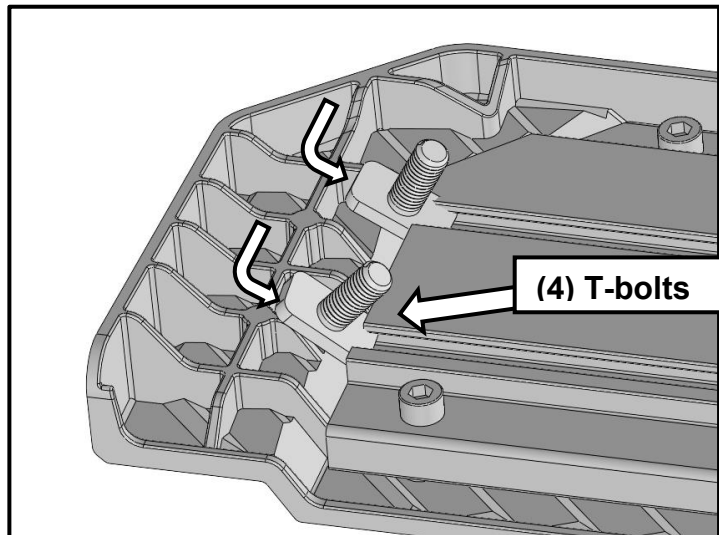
Mount the frame & support bracket to the linkage arm assembly
